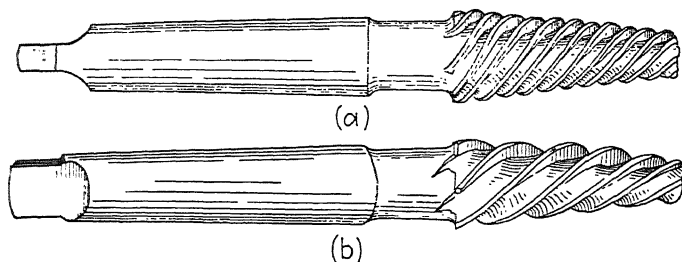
Machine reamers for taper holes. Have steep left-hand spiral teeth. (a) Finishing; (b) roughing.
